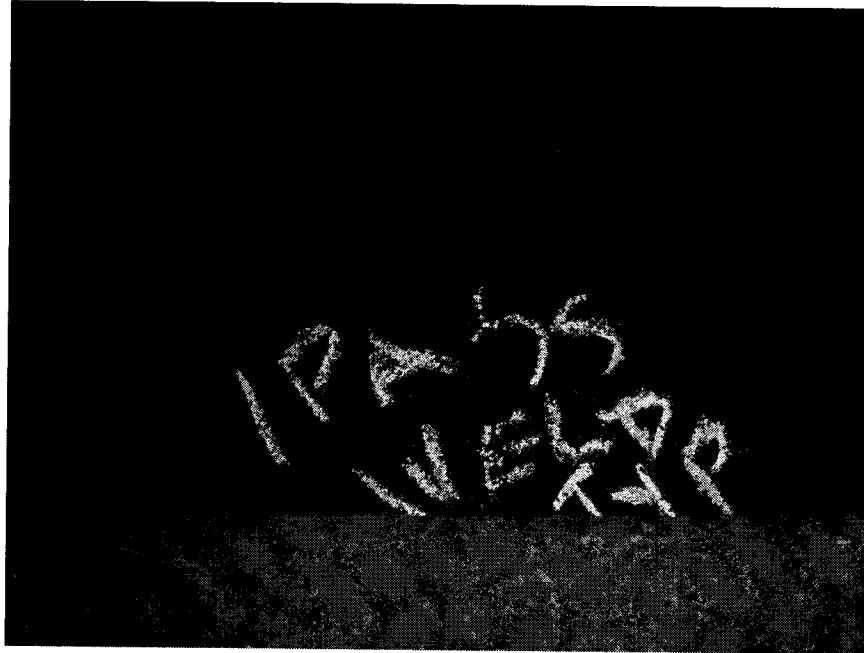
Single weld pass on Strakes F/G plate lap.
